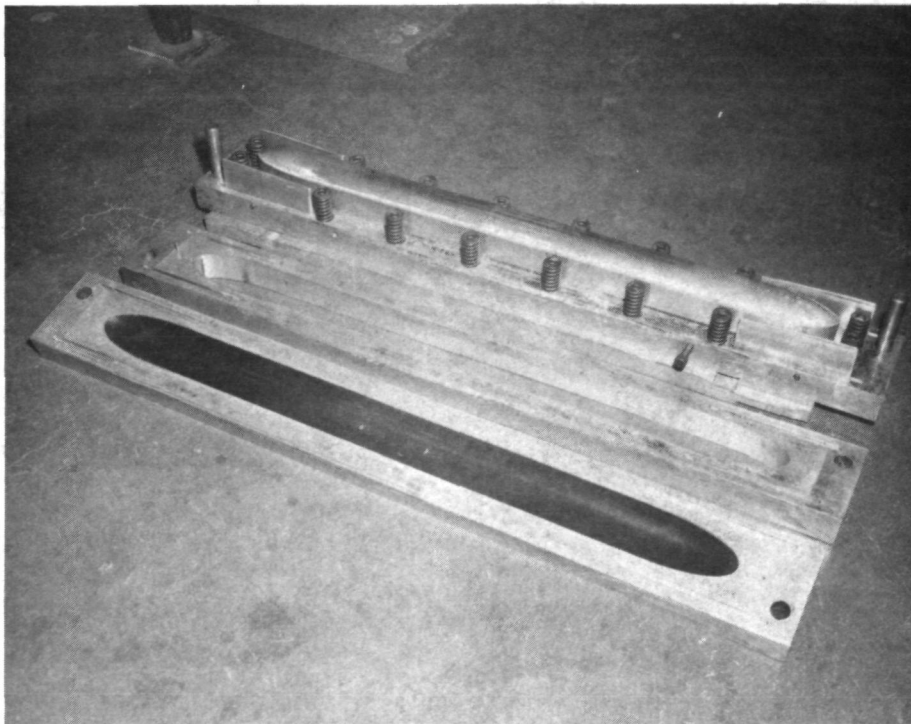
SECOND STAGE END CLOSURE FORMING TOOL
